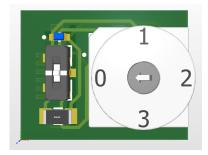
3D1 PCB 4: Buttons Periphery Board
